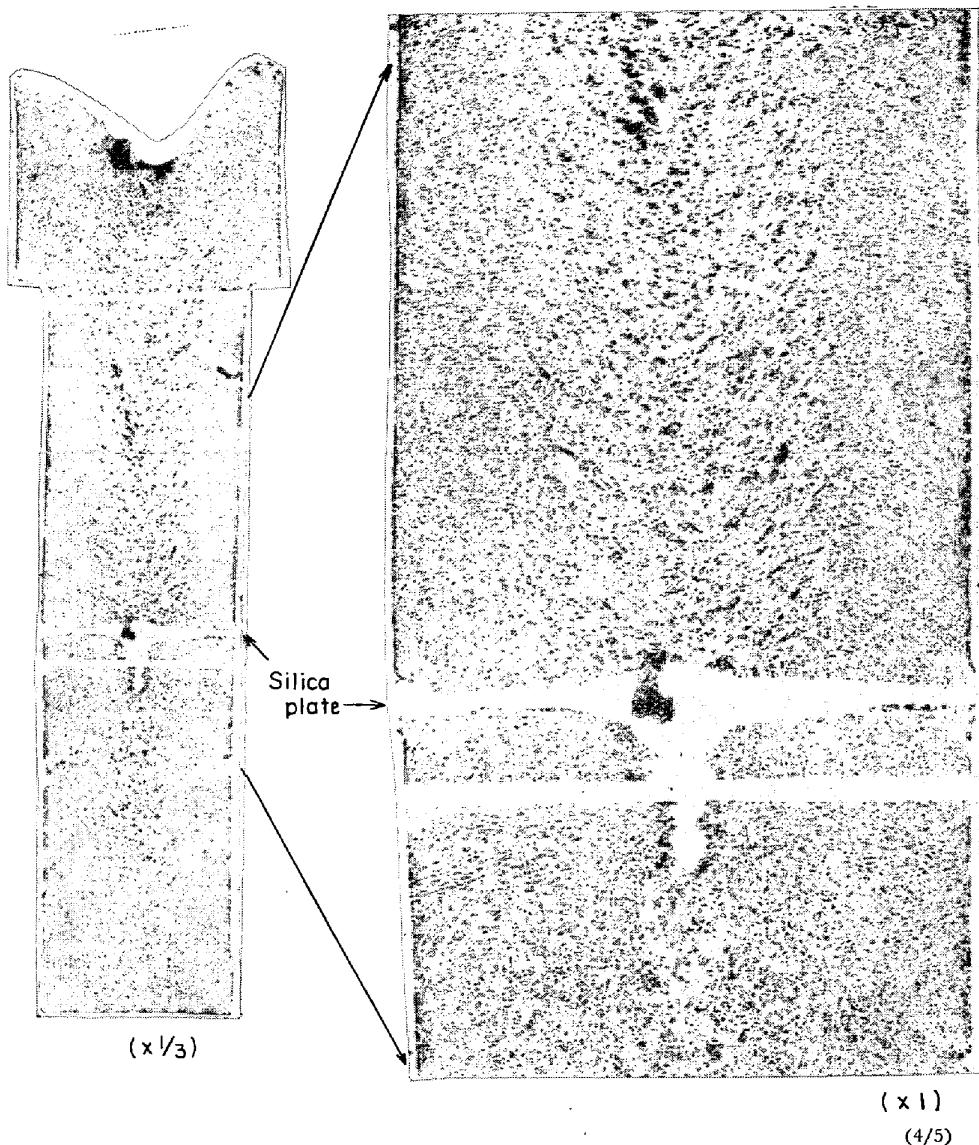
Sulfur prints of longitudinal section of E ingot.
